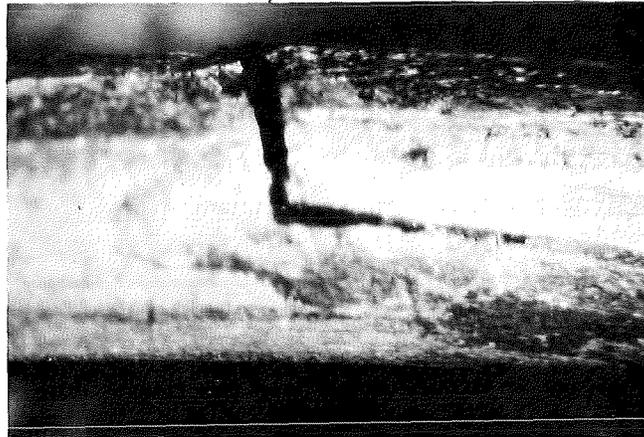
TYPICAL OUTER WIRE FATIGUE FAILURE WITH CRACK INITIATION AT ABRASION
